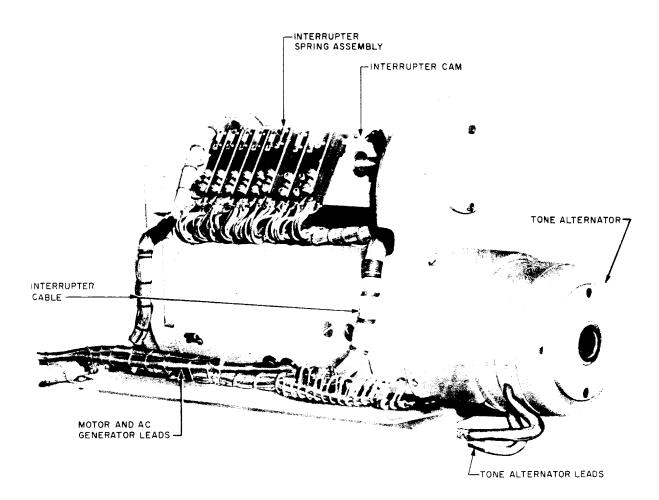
Ringing Machines - KS-15532 - 1-ampere Type
